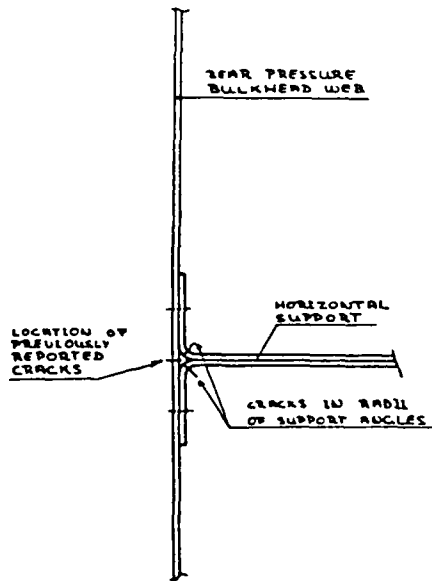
TYPICAL LOCATIONS OF F28 BULKHEAD CRACKS
